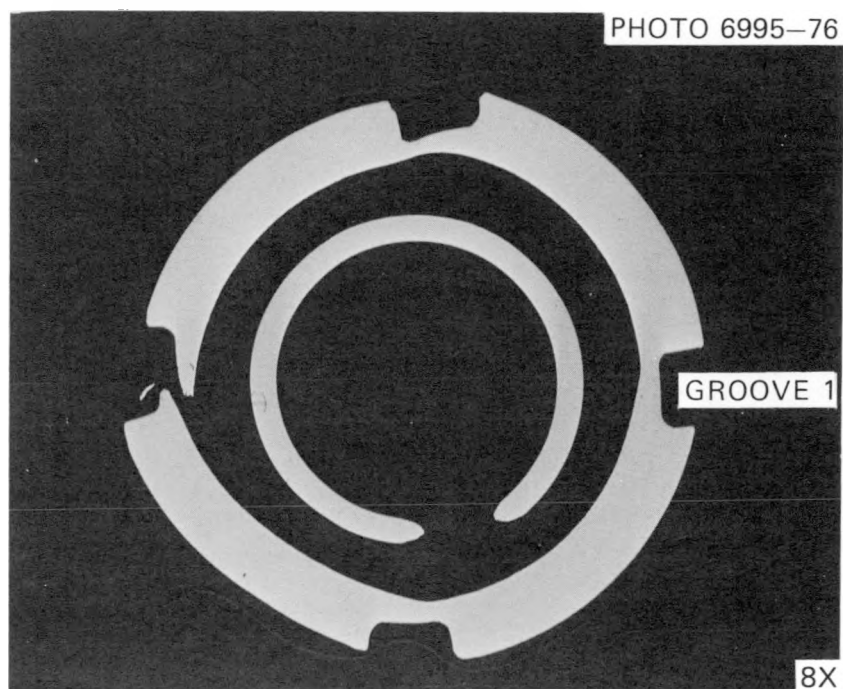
Cross section of fuel simulator 2828016 showing crack in groove 3 and distorted shape.
